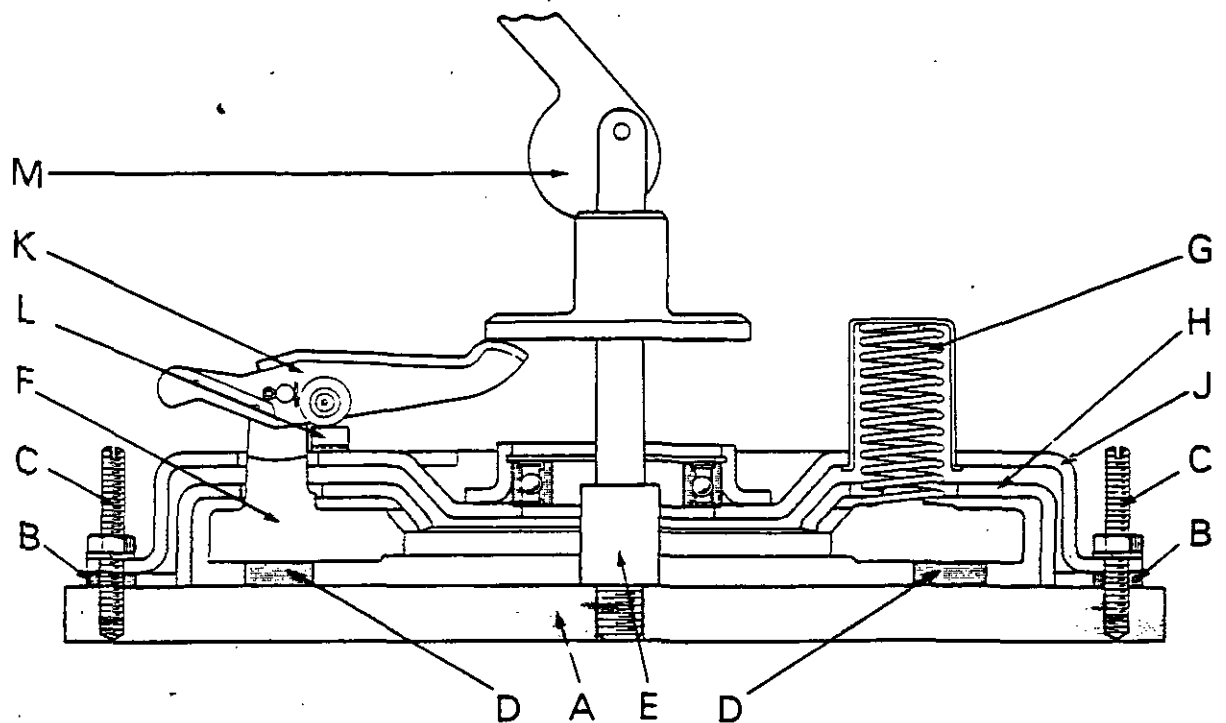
ASSEMBLING A DOUBLE CLUTCH
